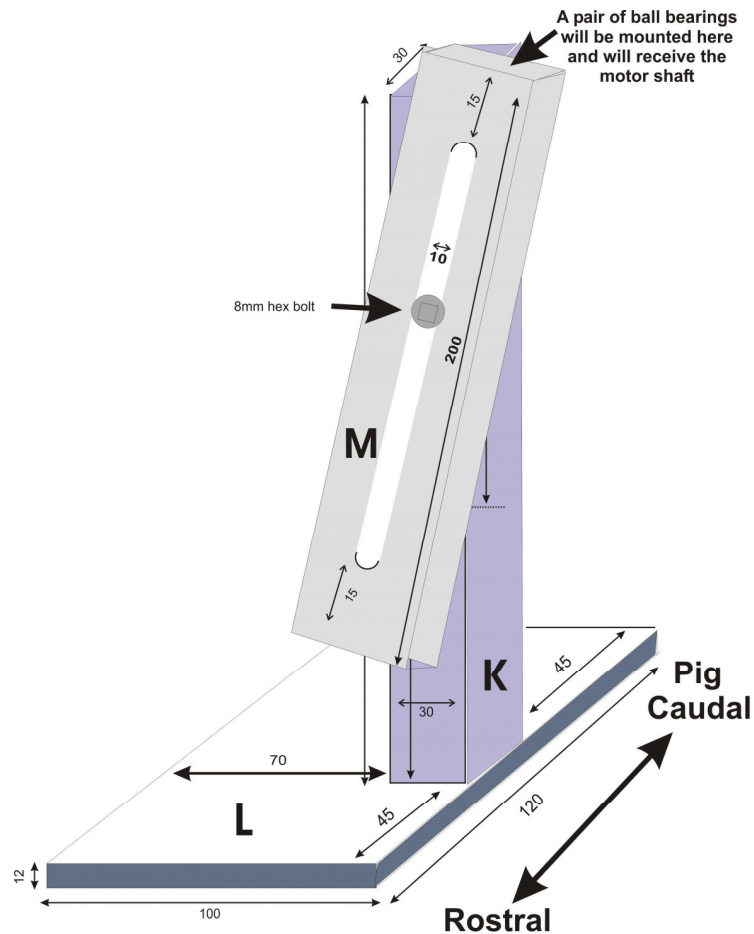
Views of the Motor mount; Parts K, L, M.
